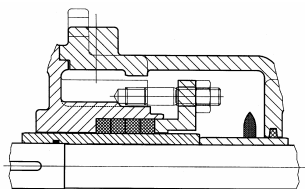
Throttle in front of the pressure side mechanical seal of a high pressure pump.
